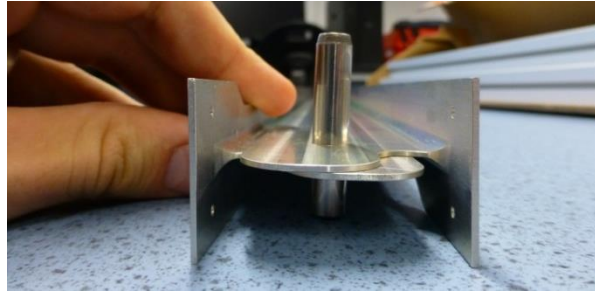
T-Cleat Assembly – Precision location hole used at assembly mating point to control height of critical interfaces between SM cylinder and SM walls.
